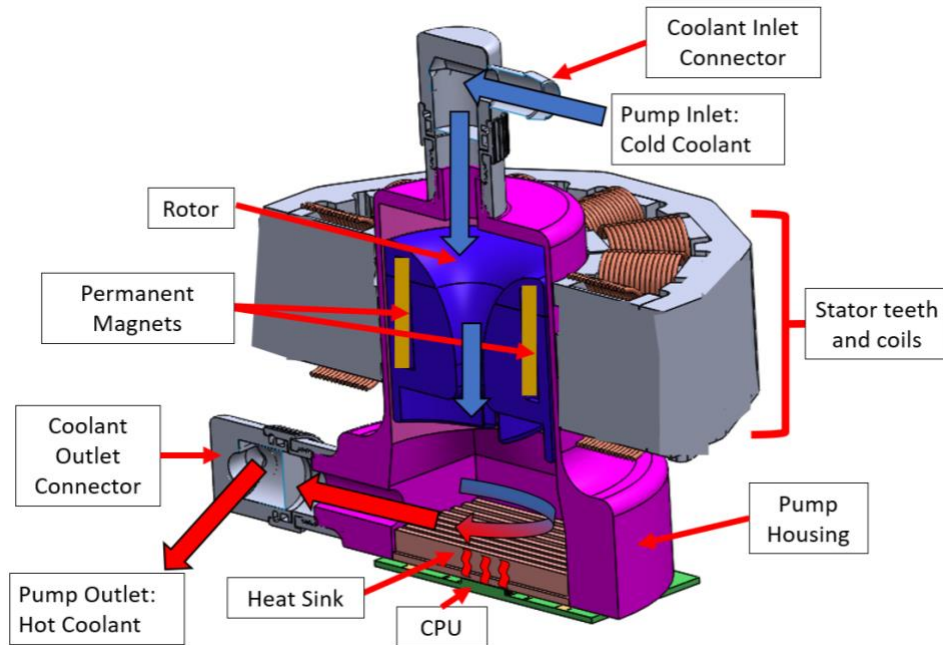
A 3D computer aid design section view of the pump design, outlining key design components and highlighting the heat transfer between the CPU and the fluid flowing through the pump's assembly.
